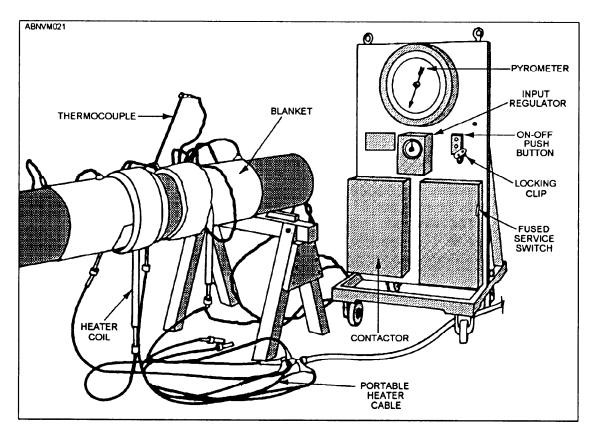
Postheating welded pipe with electric induction coil equipment.
